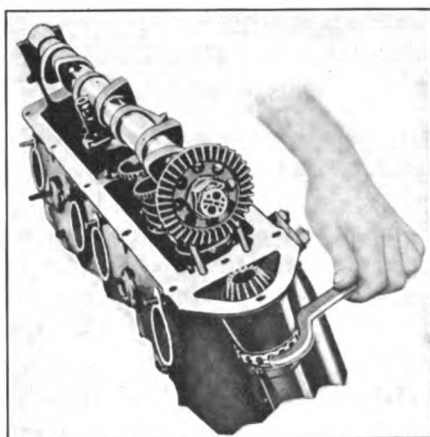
Raising or lowering vertical shaft casing, models A, I and E.
